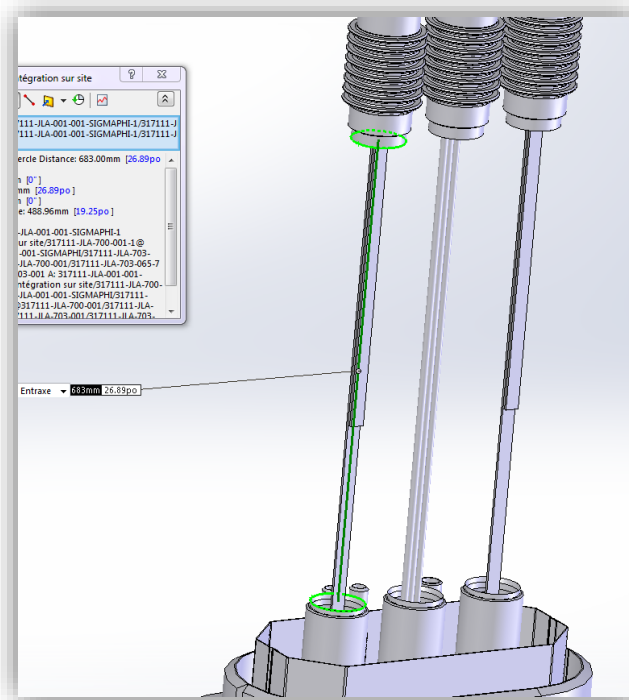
view of the connections between CCR & dipole, soldering tool & regulation system
